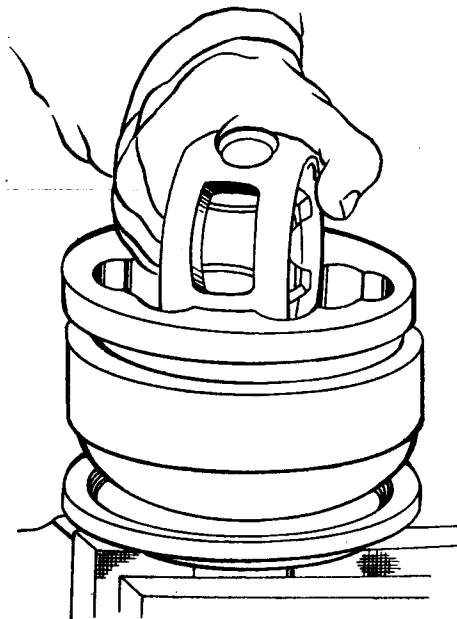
Removing Cage Complete with Holder from Joint Housing
